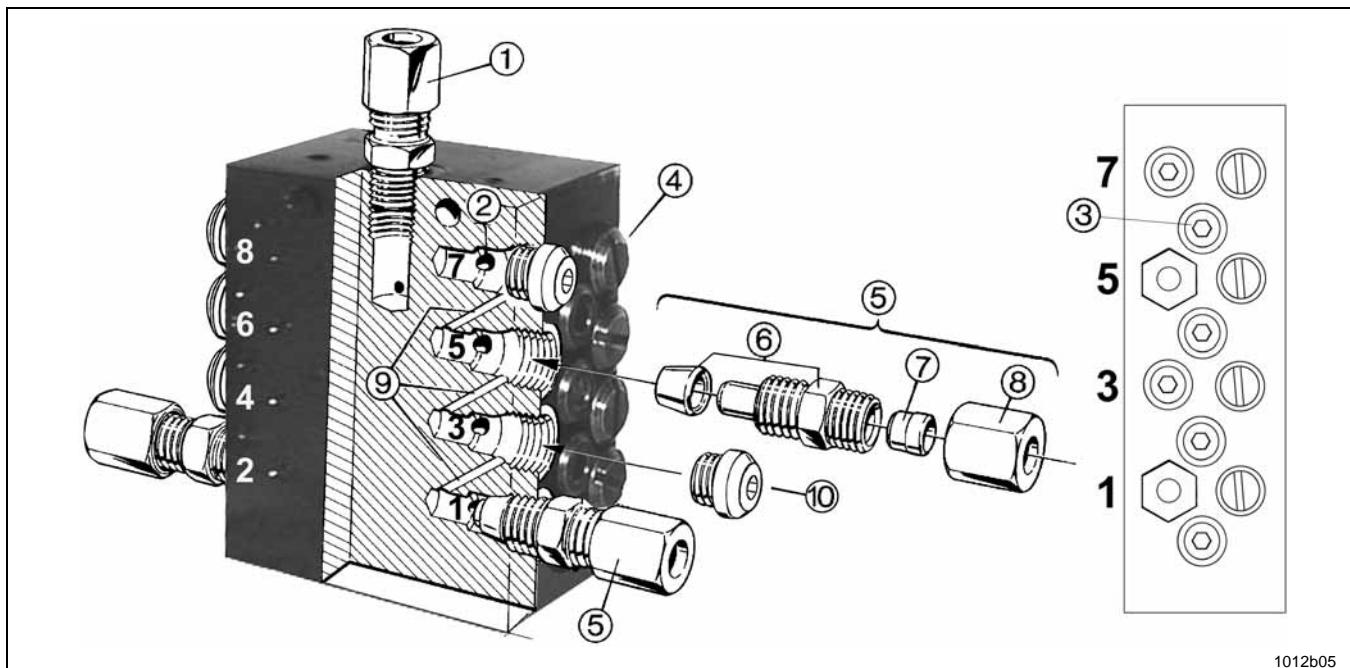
Install the push-in type outlet fittings and the closure plugs in accordance with the dosage
